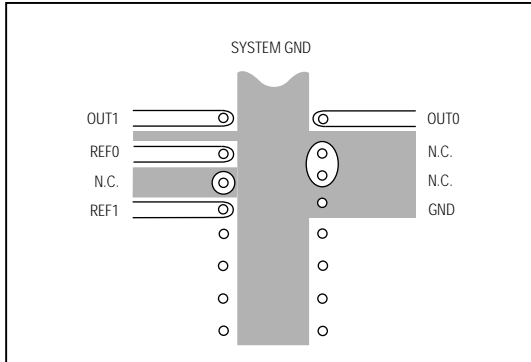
PC Board Layout for Minimizing MAX519 Crosstalk (bottom view)
